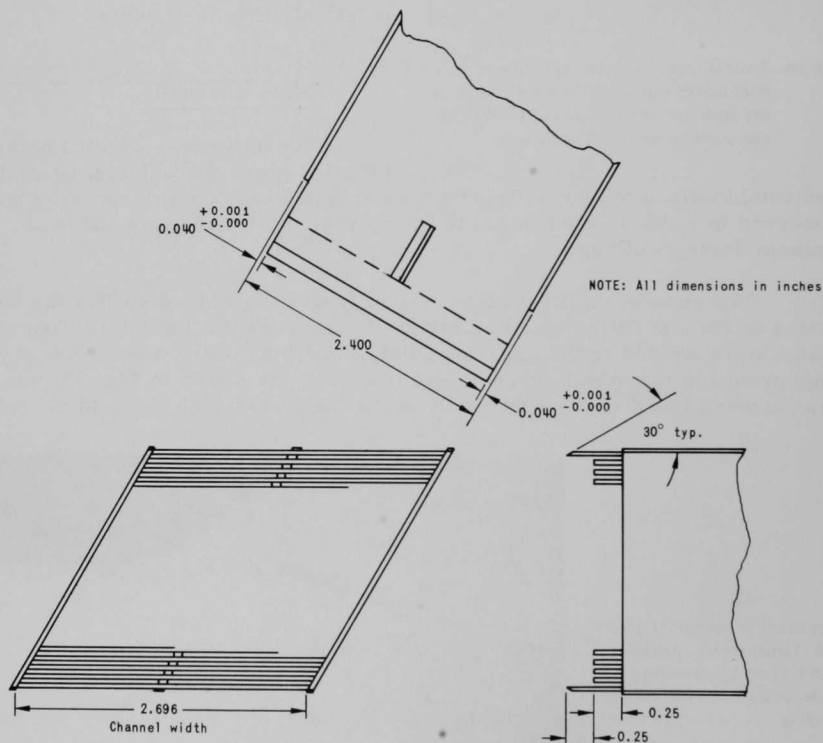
Design of Transition Joints between End Fittings and Dummy Plate Assembly
